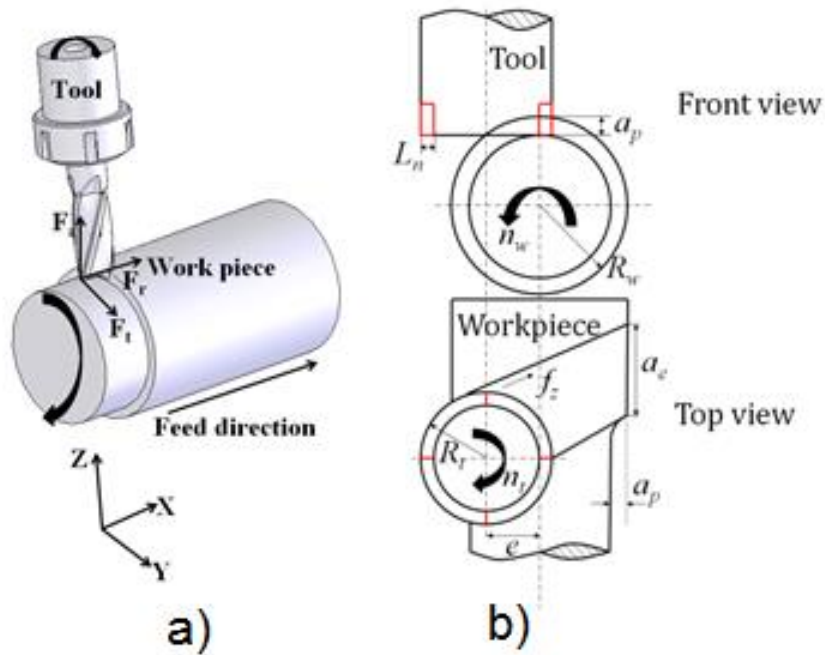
a) Turn-milling process geometry b) Parameters in turn-milling.
